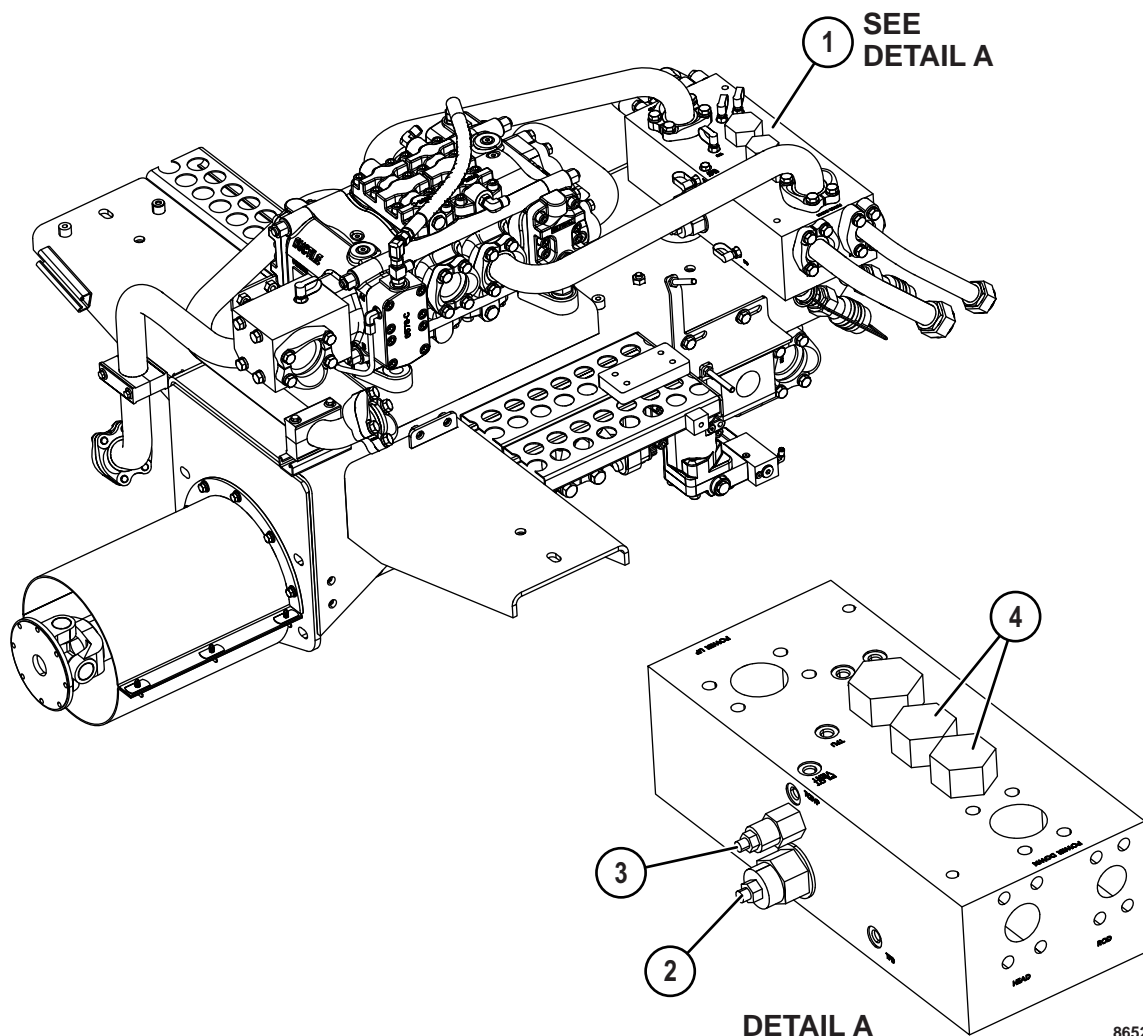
OVERCENTER MANIFOLD VALVES
